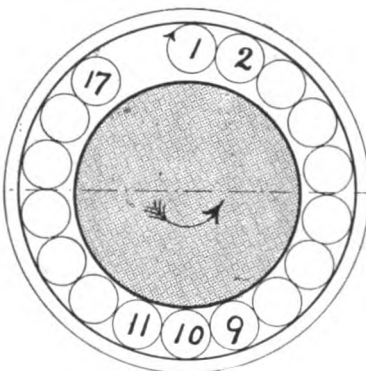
BEARING WITH BOTTOM BALLS UNDER LOAD.
